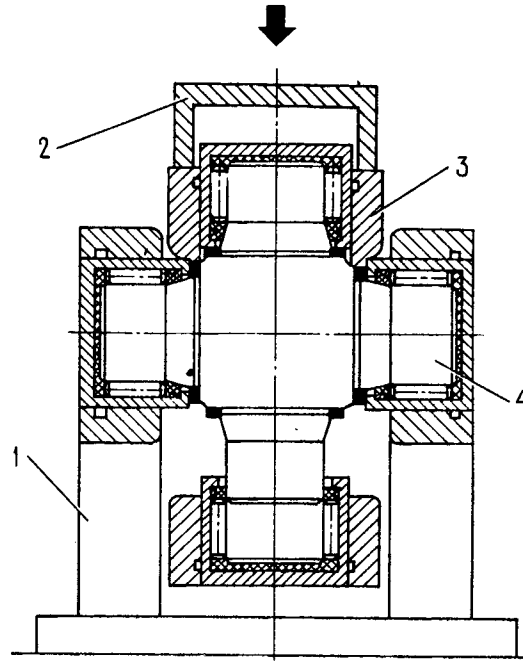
Disassembling Universal Joint: 1 - press support; 2 - bushing; 3 - universal joint yoke; 4 - cross
